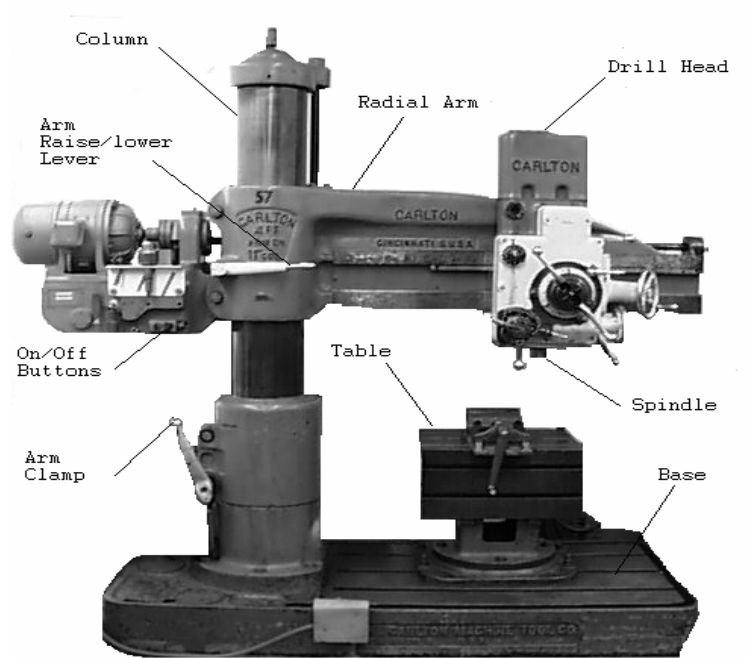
Parts of Radial Drill Machine (Krar F.S et al, 2005)
